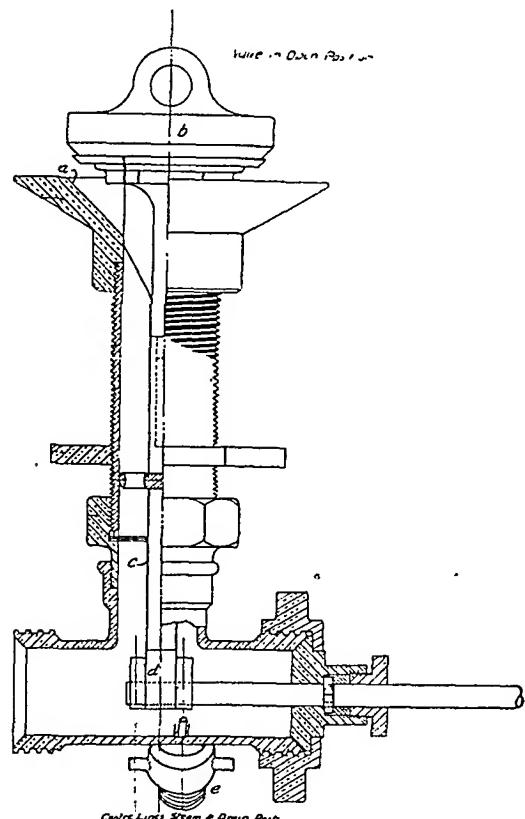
FIG. III.—Showing flush-type valve for existing round vat holders with center bottom outlet—(a) flush valve seat; (b) valve plug; (c) valve stem; (d) cam; (e) steam connection.
